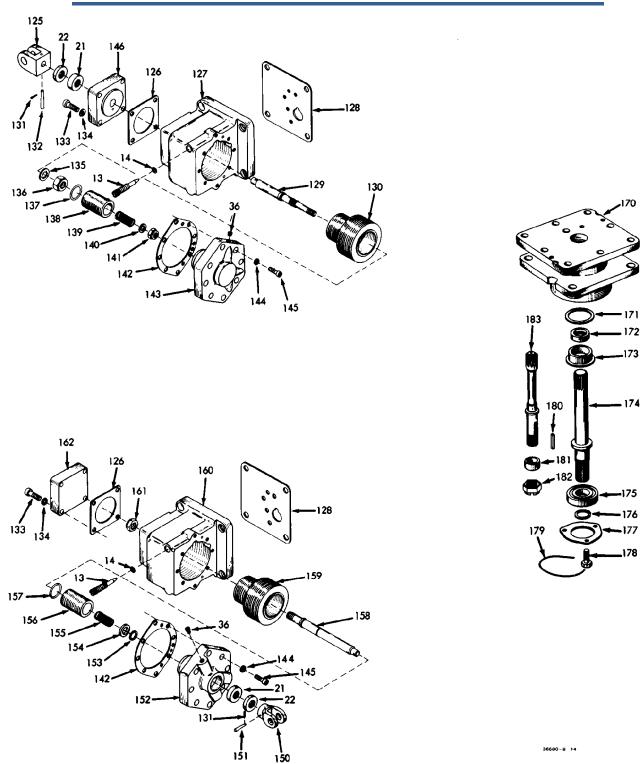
Exploded View, Alternate Power Cylinder and Base Assemblies
